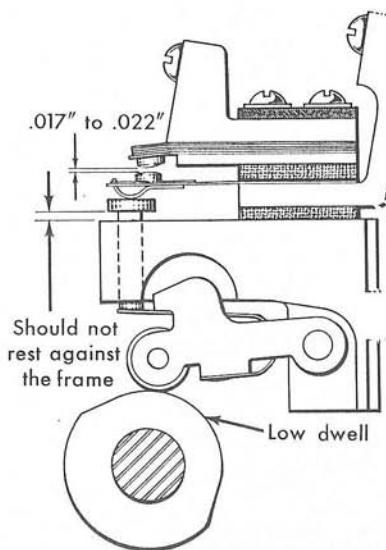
Plunger Circuit Breaker, Roller Cam Follower, Adjustment 4
